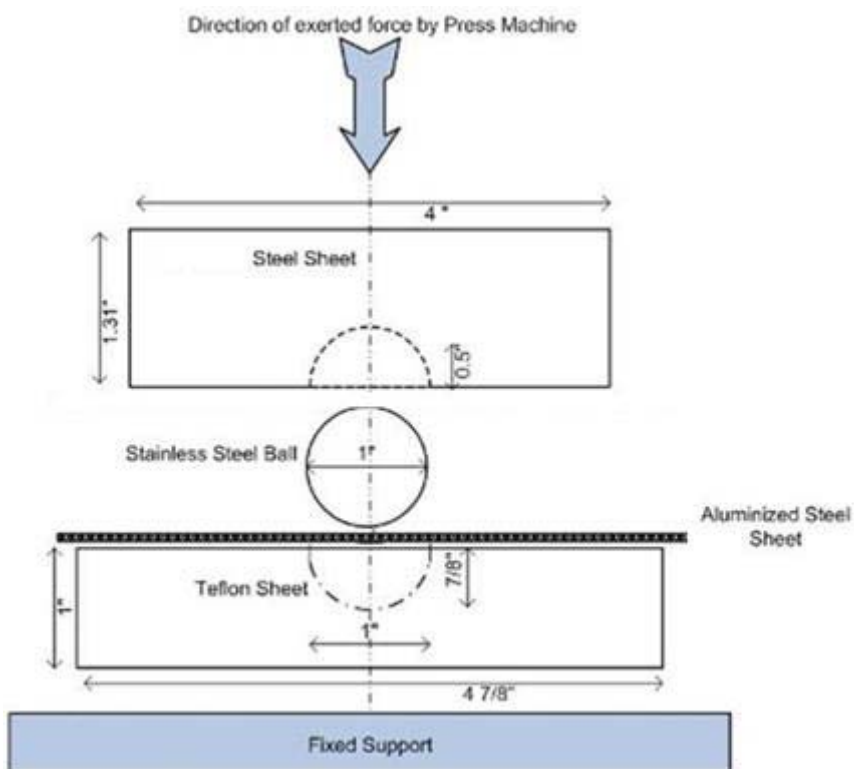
Dimpling Specimens Using a Press-Sketch Shows Dimensions for the 1-in Ball Case.
